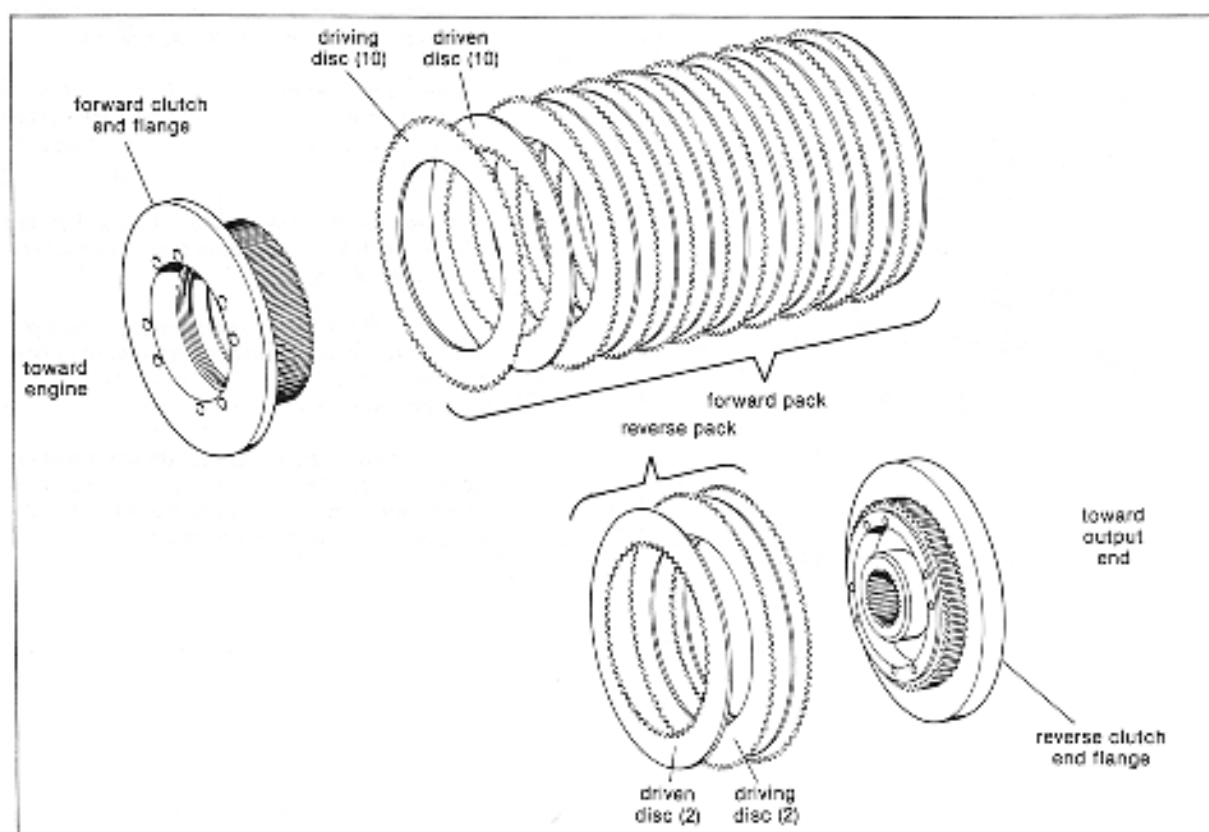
HP 500 PTO W/Brake Clutch Disc Configuration (1-00100-4300 only)
